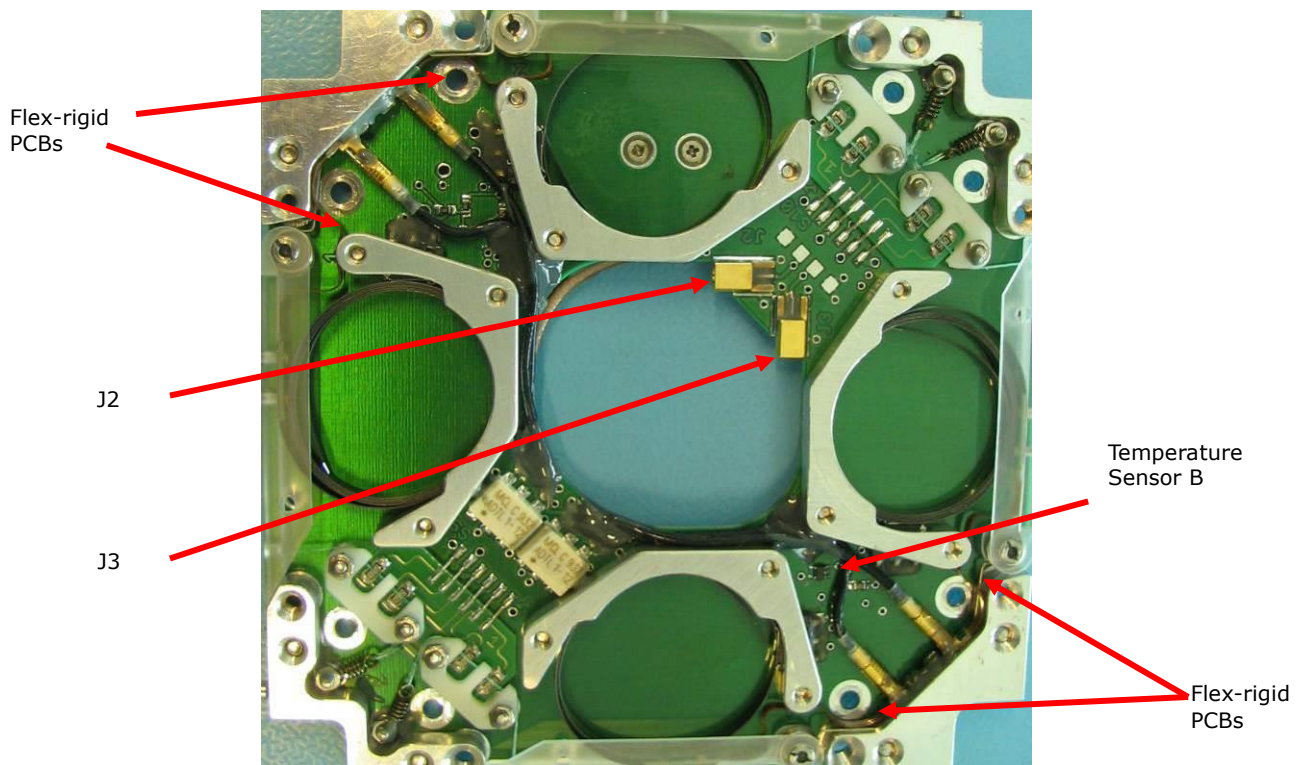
AntS Top side electrical component location (double dipole configuration shown)
